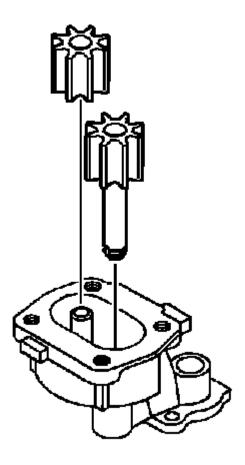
View Of Oil Pump Cover Courtesy of GENERAL MOTORS CORP.
